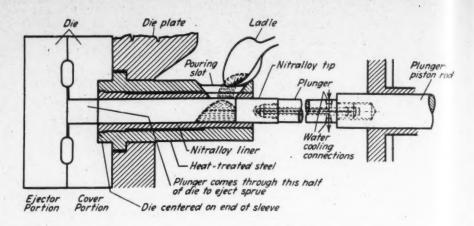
Sectional diagram showing the die, cold chamber, and horizontal ram or plunger (in charging position) of a modern cold chamber type of die casting machine.
